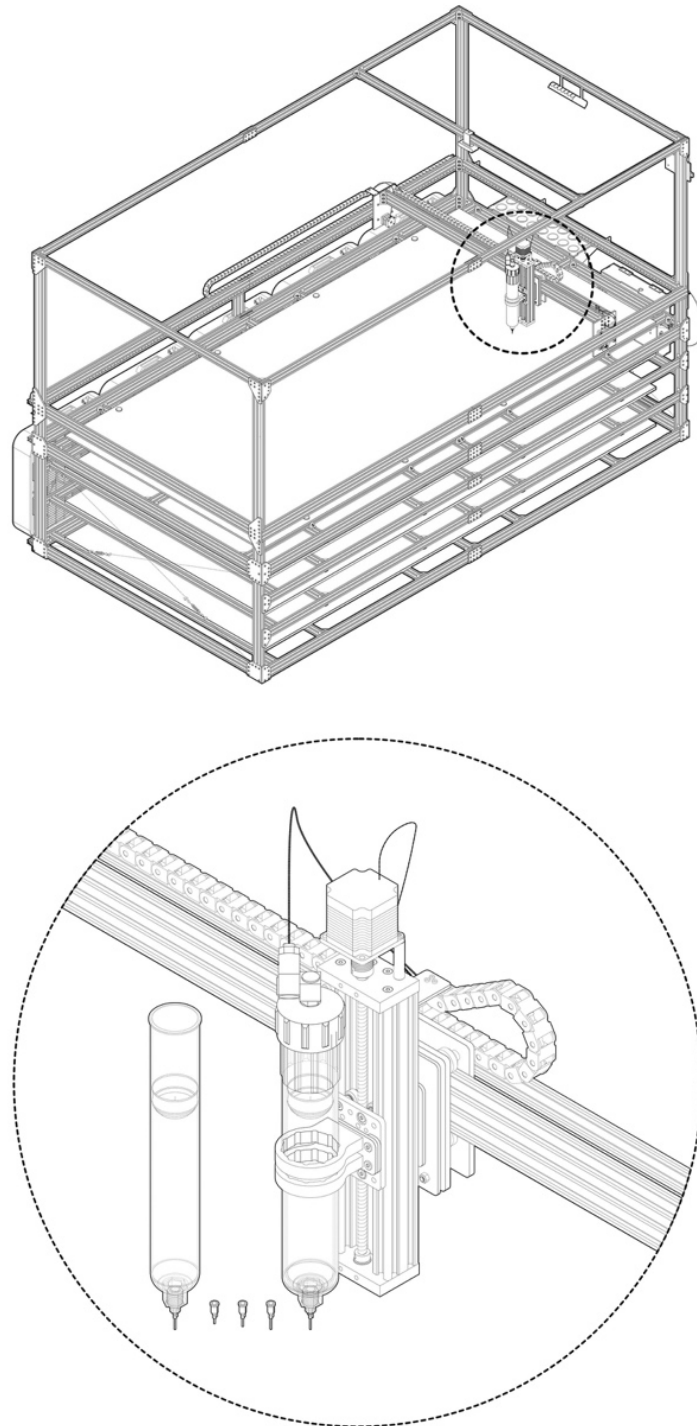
(top) Technical isometric drawing of the CNC biopolymer printing gantry showing print and drying beds. (bottom) Detail drawing of the end effector with removable cartridges and nozzle diameters.
